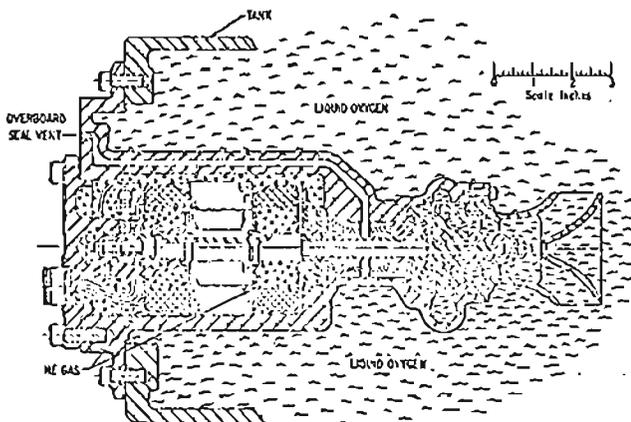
Liquid Oxygen Pump With Helium Inerted Motor.
